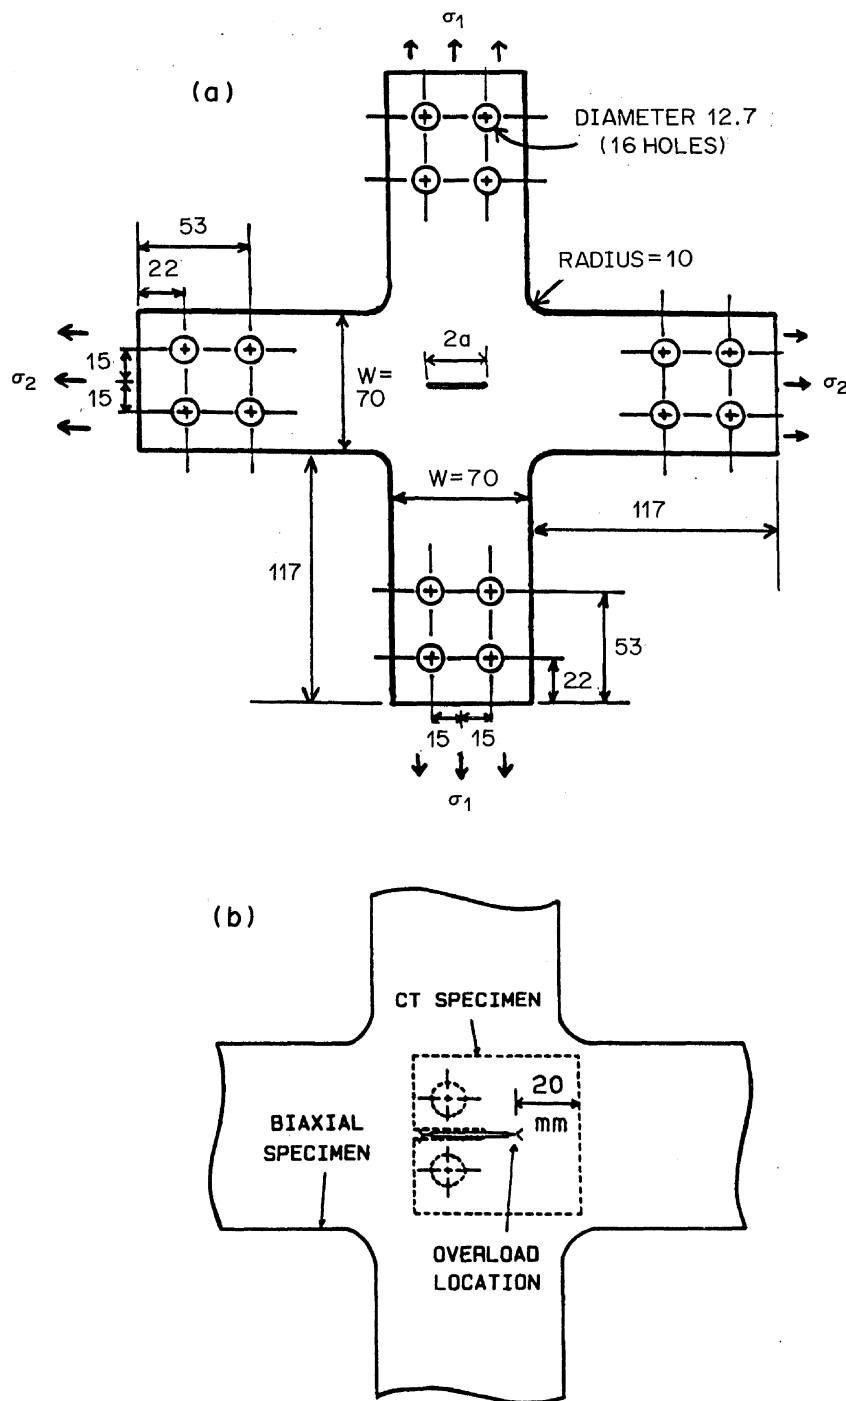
Biaxial test specimen geometry. (a) Full specimen; dimensions in mm. (b) Location of CT specimen machined out following biaxial overload.
